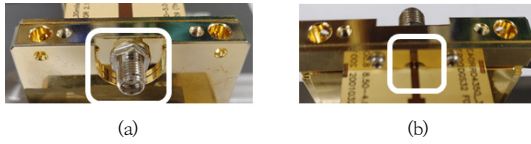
Combined RF coaxial connector (a)outside view (b)inside view
